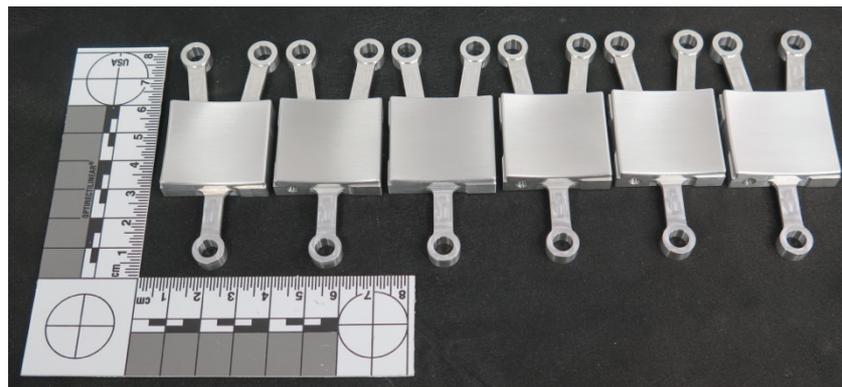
Additively manufactured CHAPS-D optical mirrors, after 3-D printing and coarse machining; before NiP plating and single-point diamond turning.
